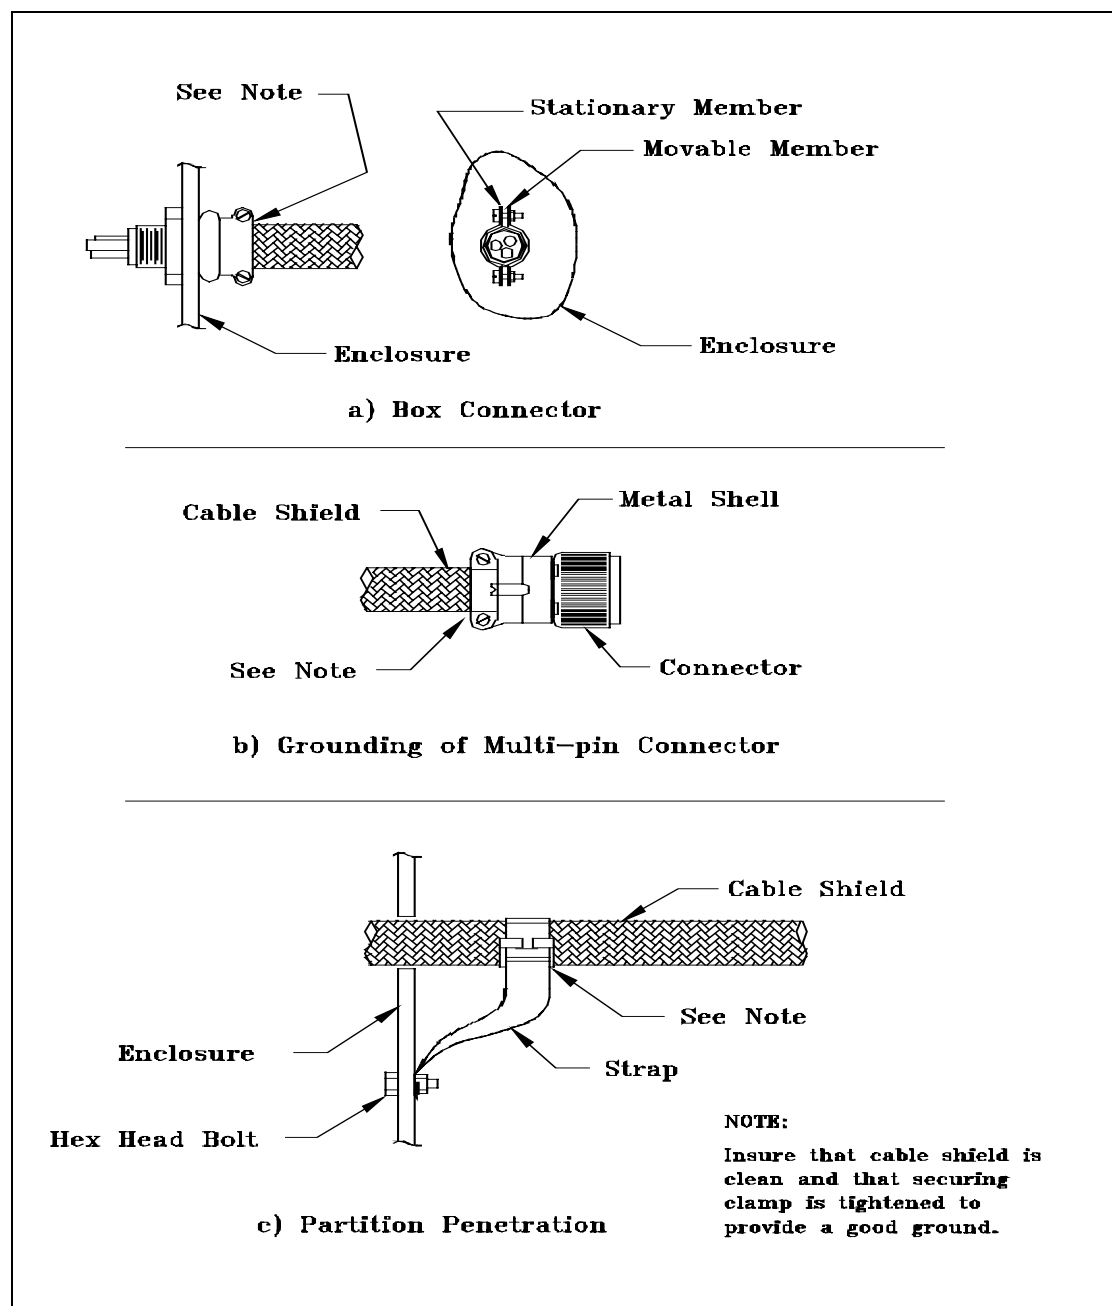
Figure III. Grounding of Overall Cable Shields to Connectors and Penetrating Walls
